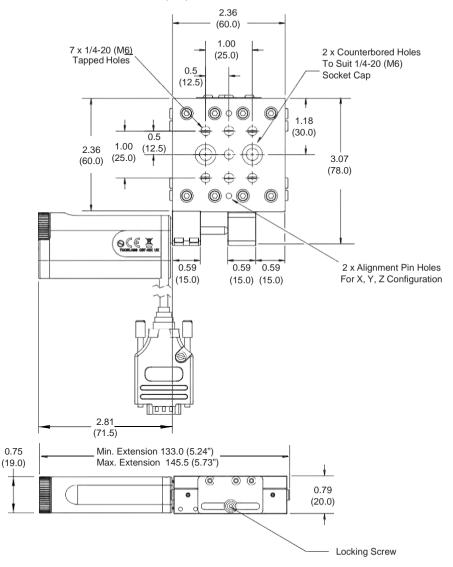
Dimensions – LNR25ZFS (stepper motor drive)
